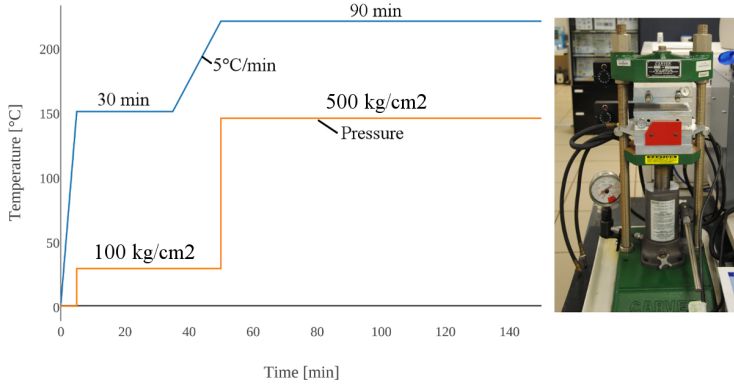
Press condition for R-1515 process customized for PCB magnetic integration; 2112 Carvier press used for the lamination.
